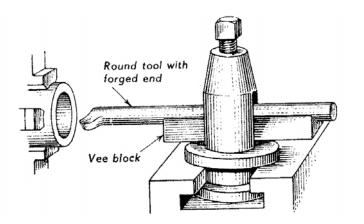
(a) Boring tool mounted in the tool post in centre lathe.
